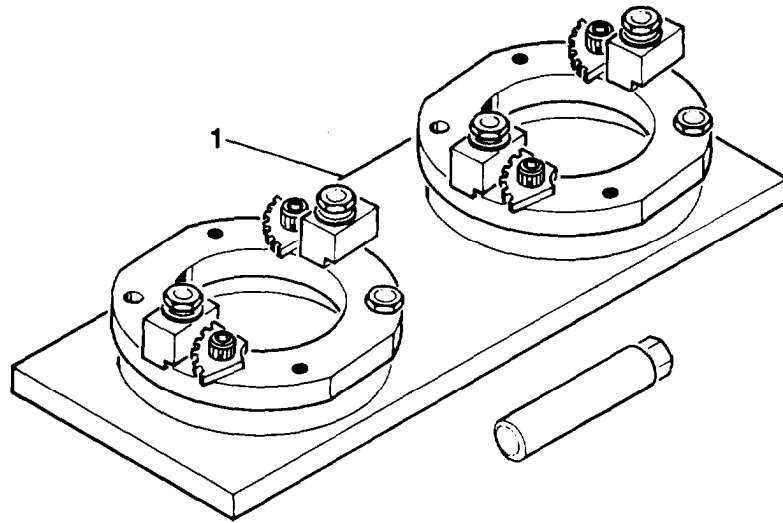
SPECIAL TOOLS (SHEET 1 OF 2)
